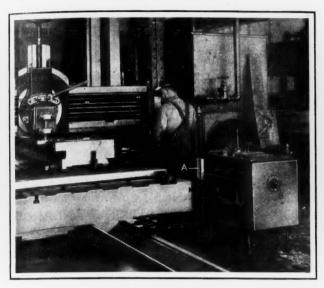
Planer Equipped with Convenient Tool-stand on which Several Controls are Mounted
